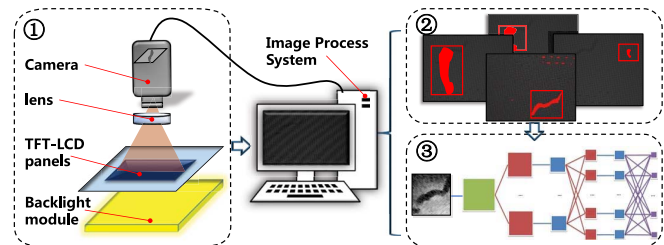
Steps involved in inspection of mura defects by using the vision inspection equipment: ①: image acquisition, ②: defect detection, ③: defect recognition.
